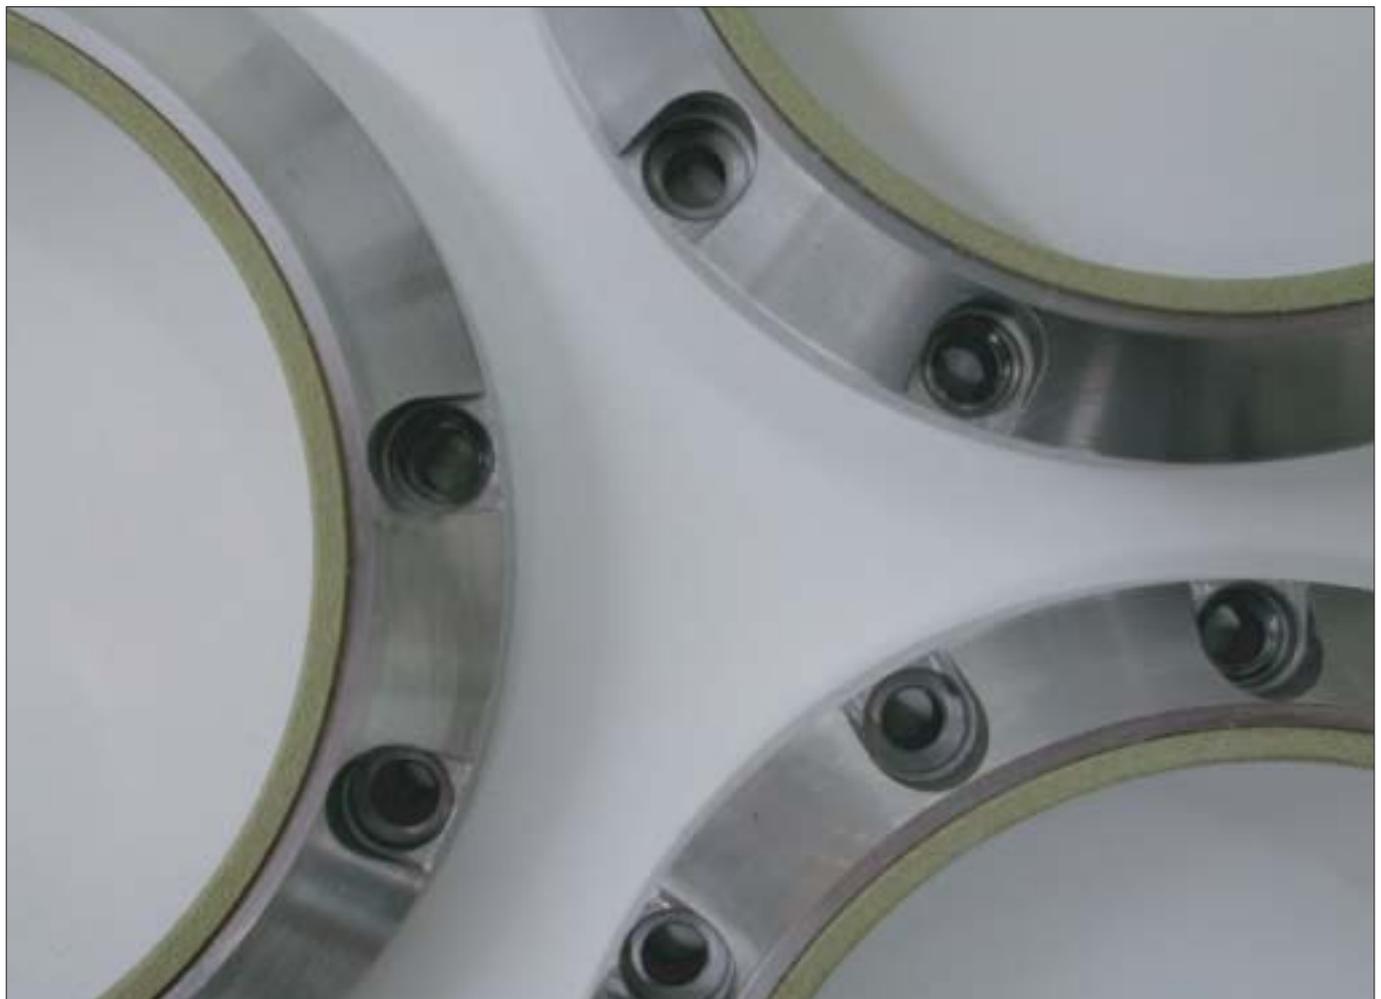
vDD tools for dressing internal cylindrical grinding wheels – internal layer
